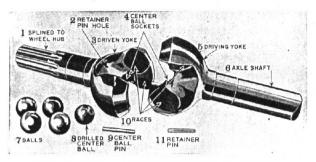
AXLE SHAFT UNIVERSAL JOINT
